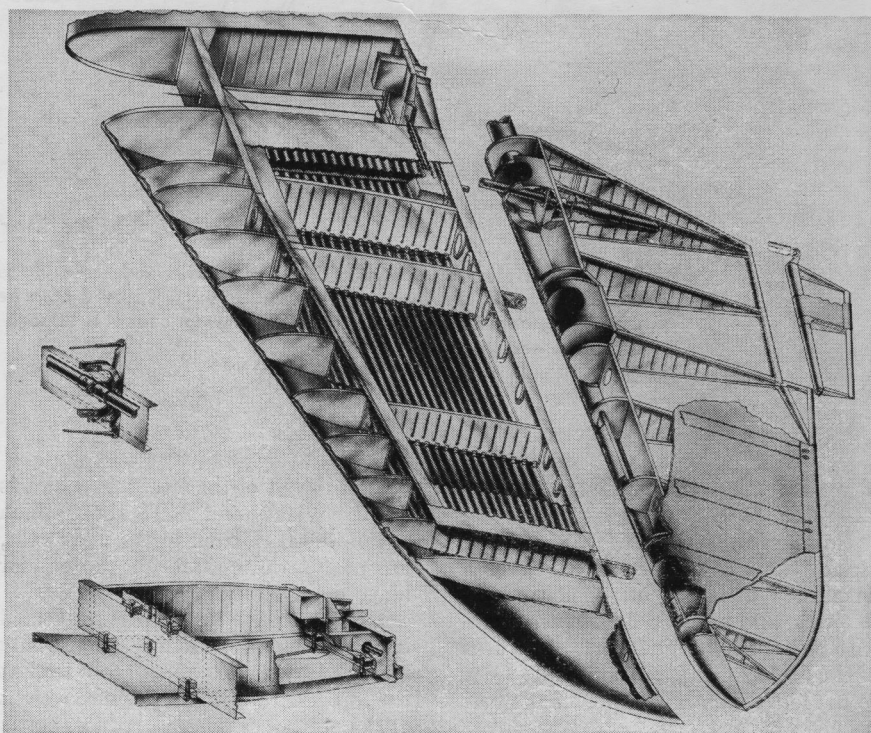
The stabilizer has stainless-steel two-spar construction with corrugated ribs and plain nose formers. The elevator has D-section spar and pressed stainless-steel ribs, fabric-covered.
